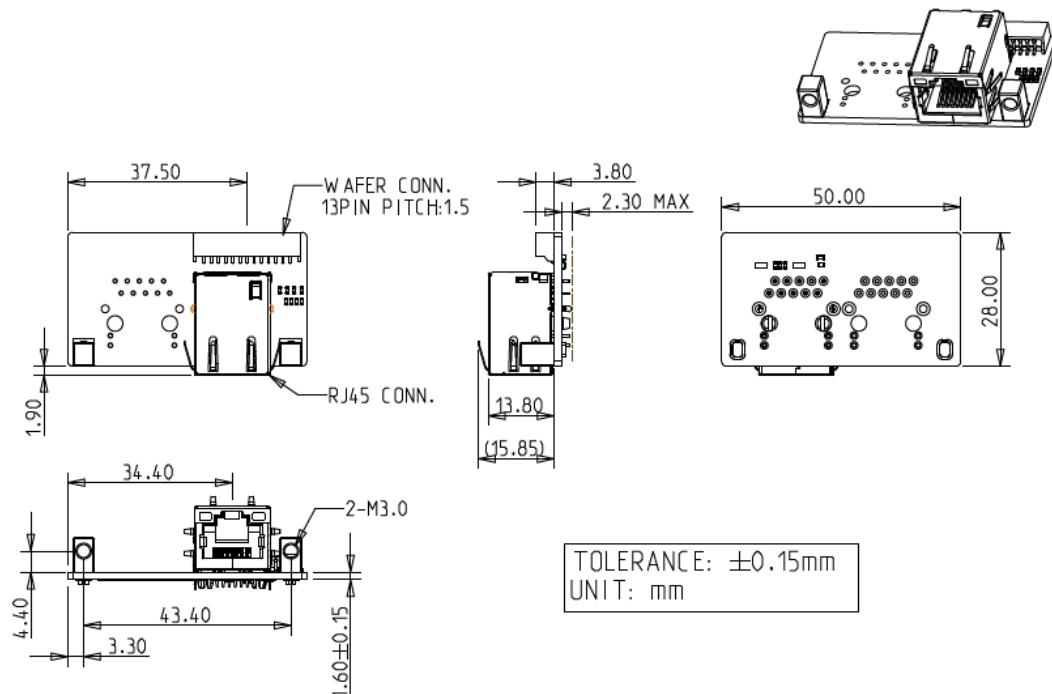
Mounting Hole Daughter Board Drawing (EGLP-G1S4-C1/W1)
